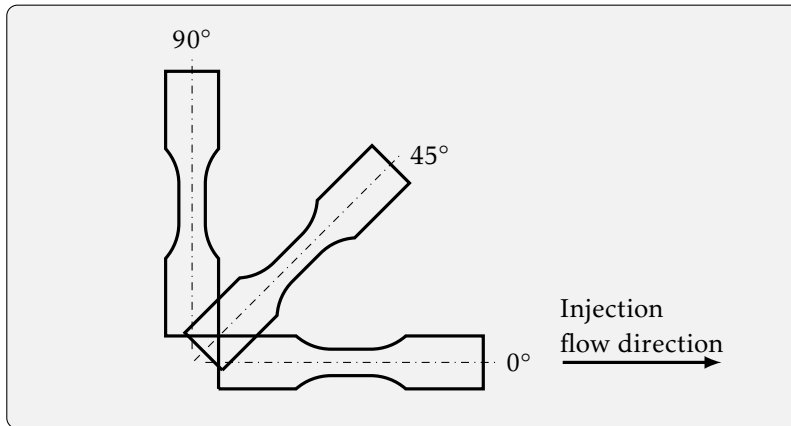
Illustration of the three specimen orientations with respect to the injection flow direction. The surrounding box illustrates *one half* of the injection moulded plate from where the specimens were cut from. The dimensions of the illustrated plate and the specimens are proportional, but the position of the specimen outlines do not necessarily represent the position from where they were cut.
